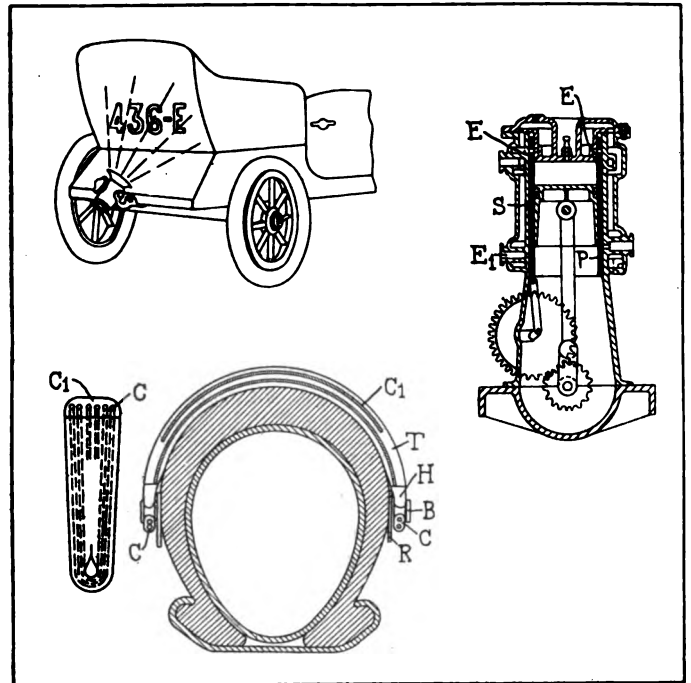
Ruettiger scheme of carrying number. Fig. 17—Kitchen tire tread. Fig. 18—Miller sleeve valve motor
